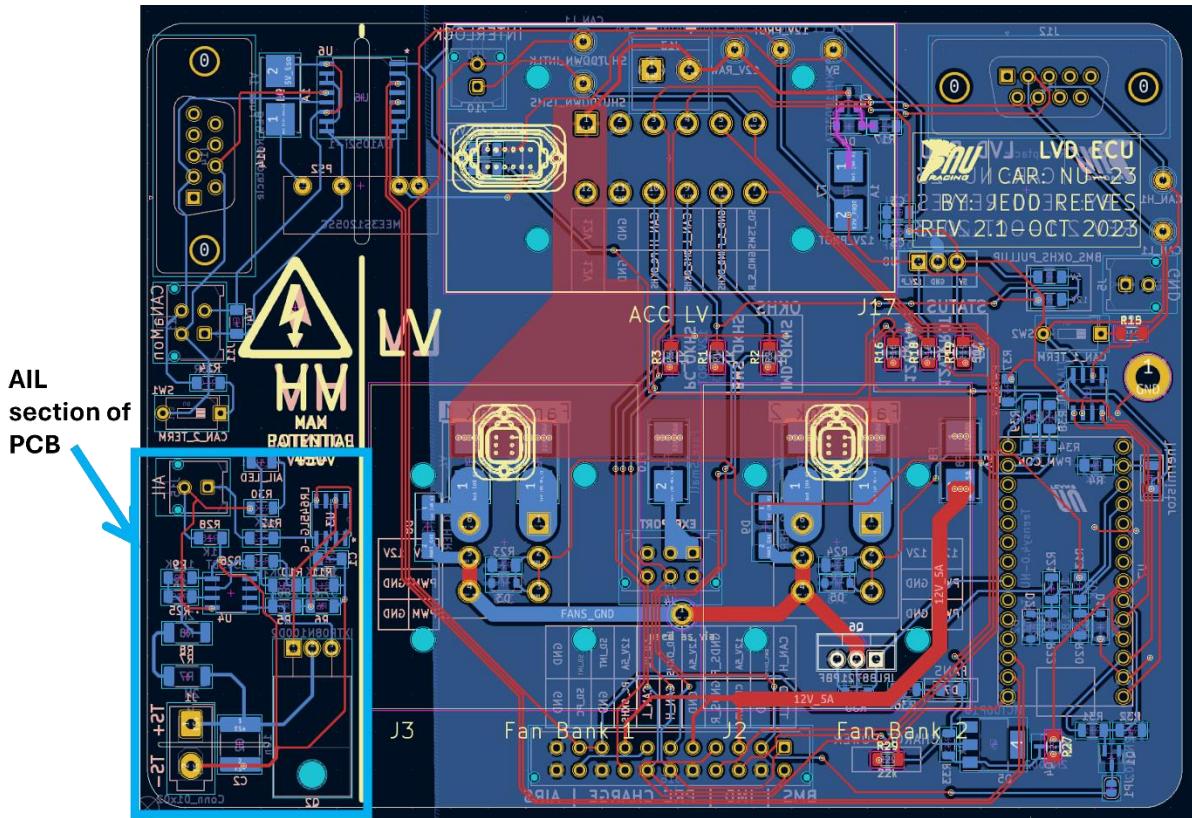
LVD V2.1 PCB: AIL section of the board outlined
